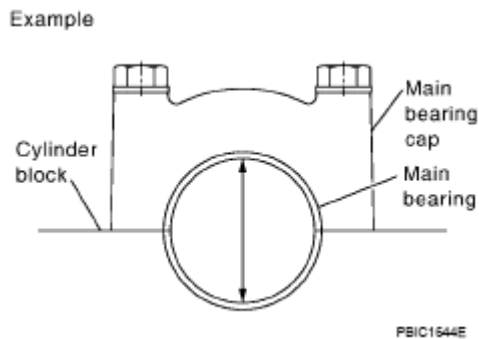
Identifying Cylinder Block, Main Bearing And Main Bearing Caps
